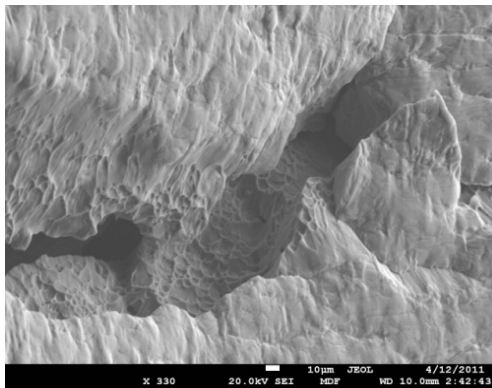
Dimples as well as shear type failure on the damaged surfaces
